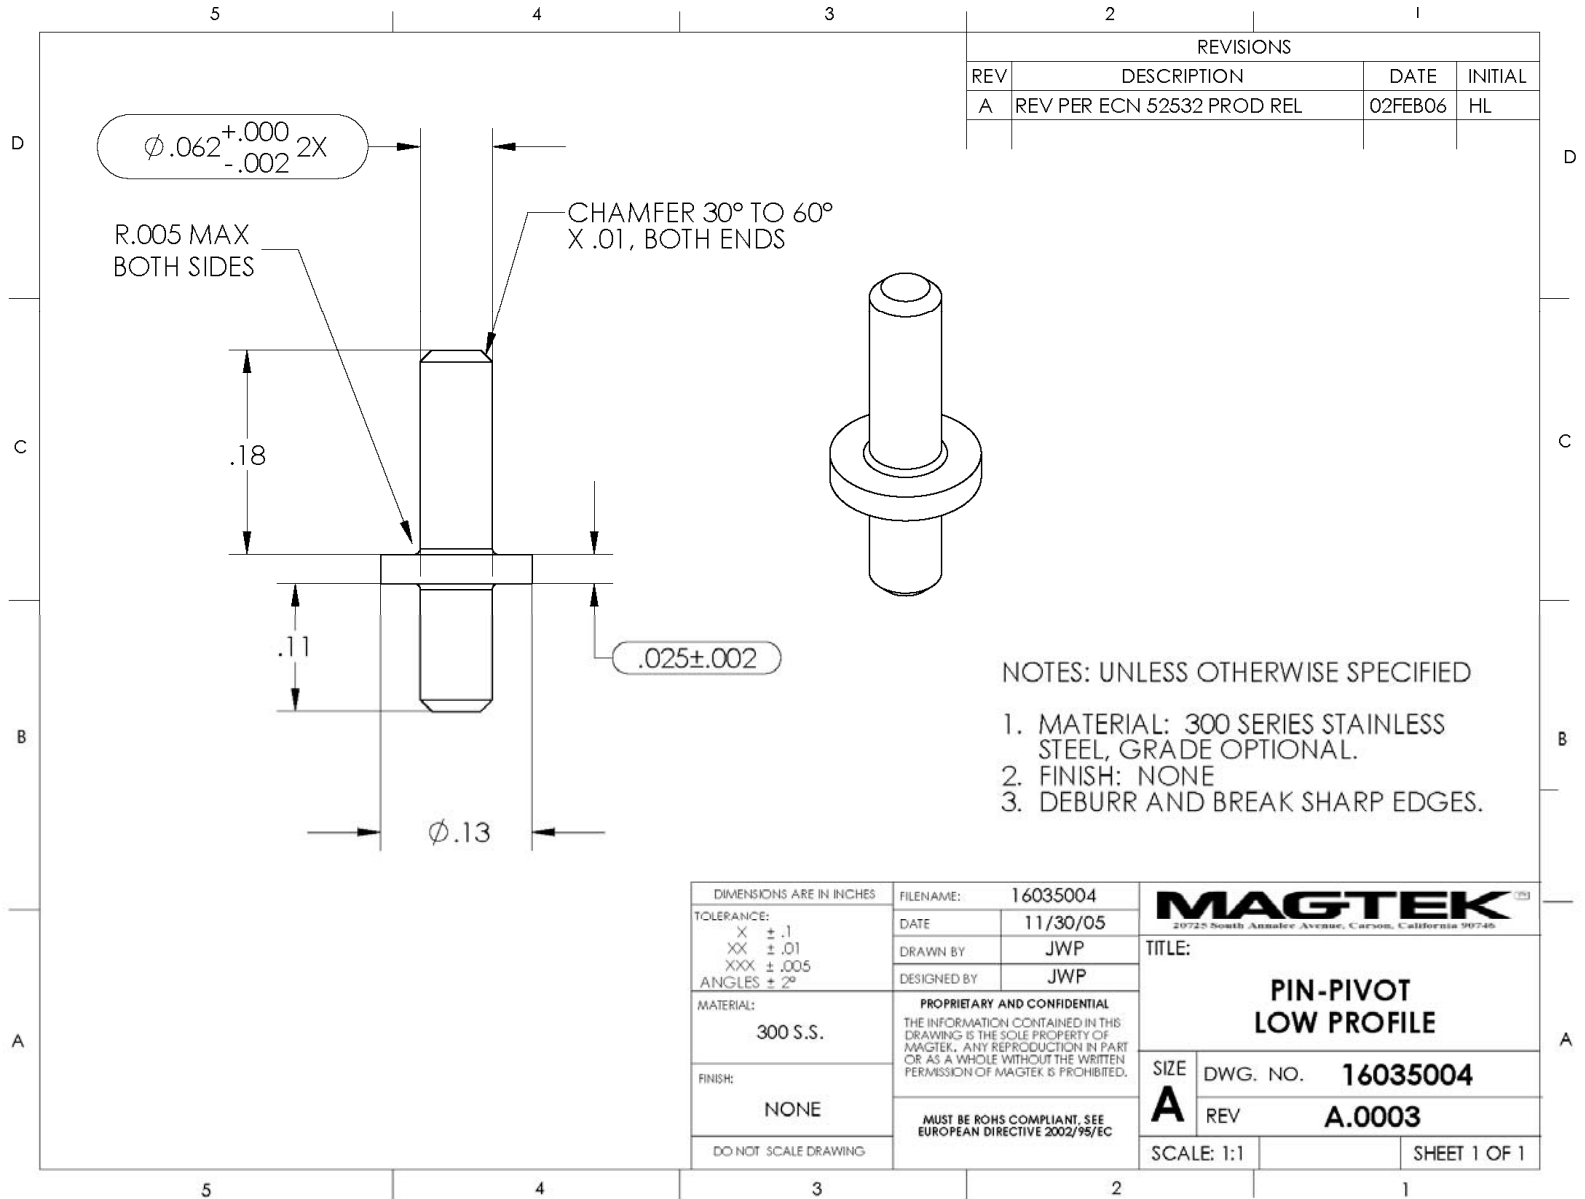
Pin – Pivot (Used for Beam Style Head Mounting)
